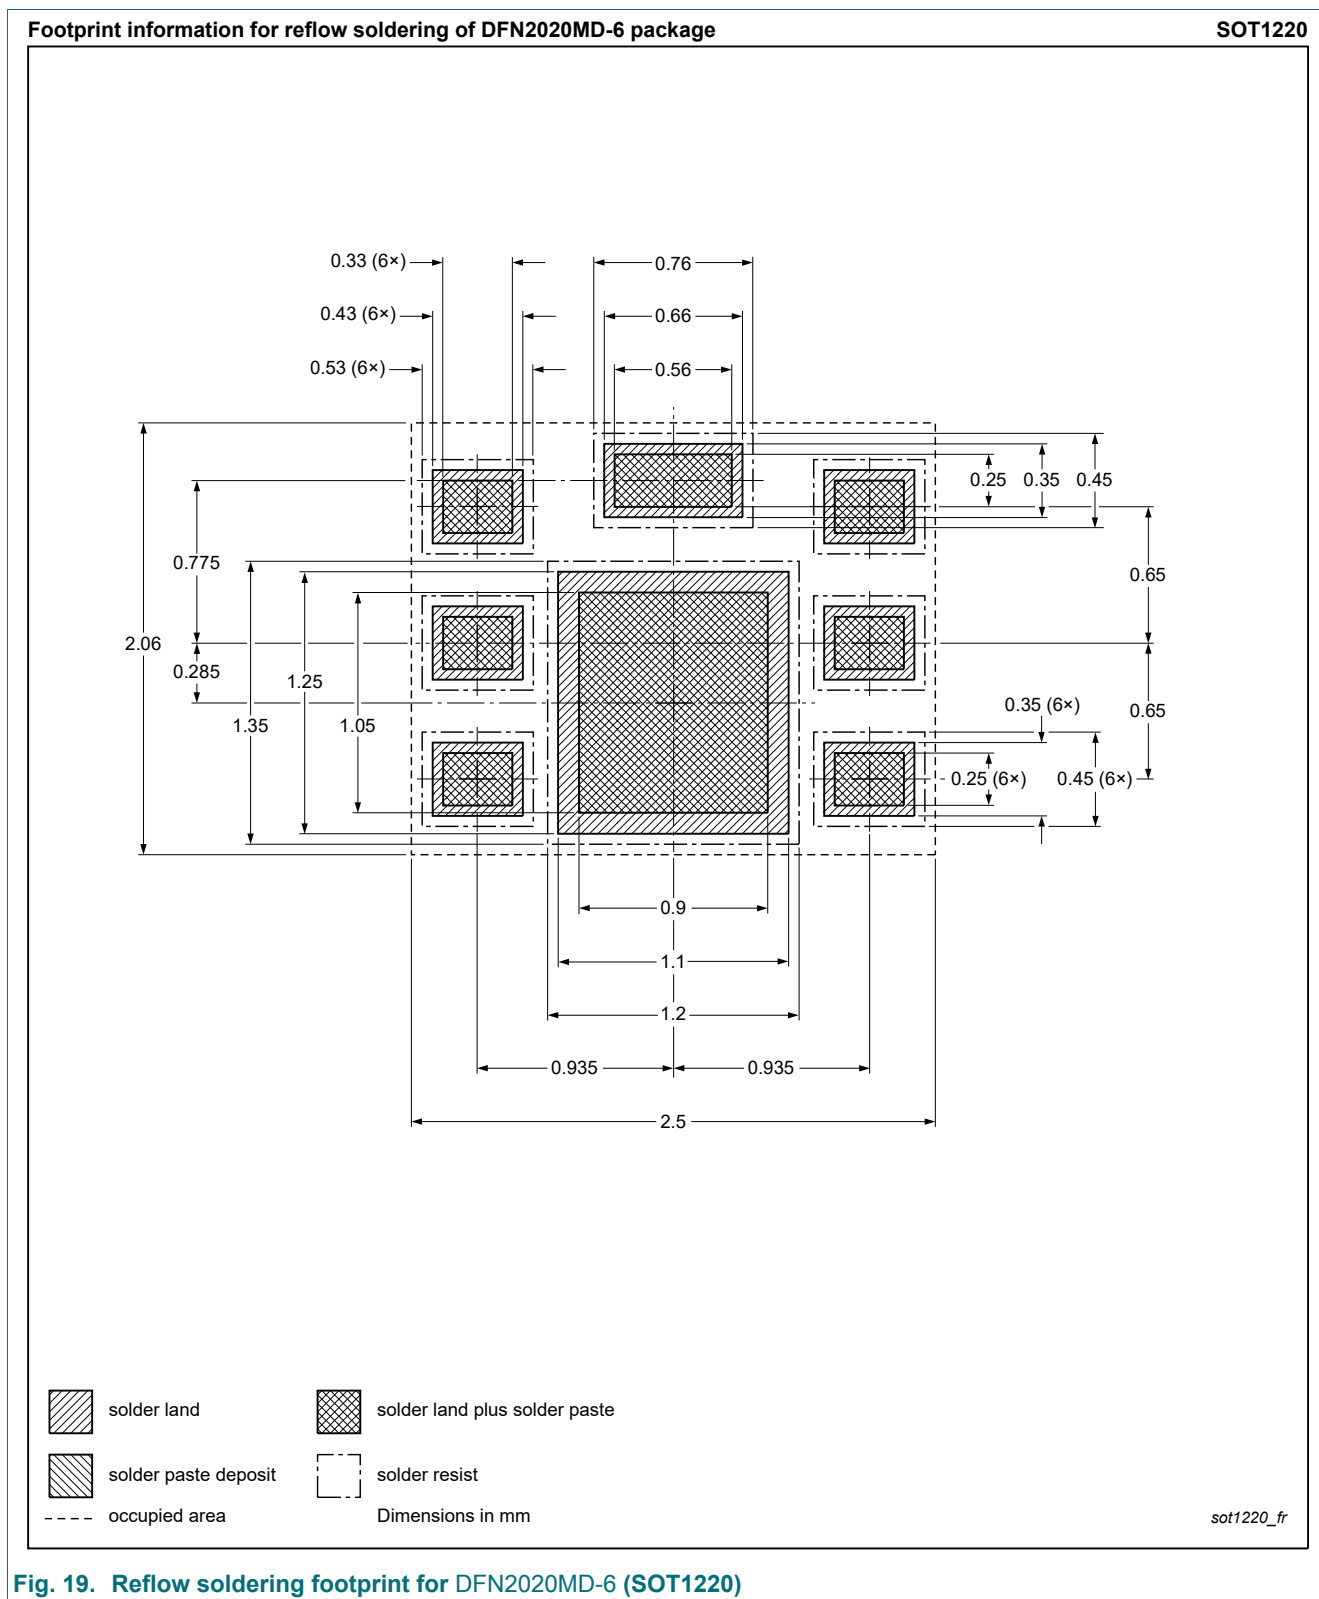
Reflow soldering footprint for DFN2020MD-6 (SOT1220)
